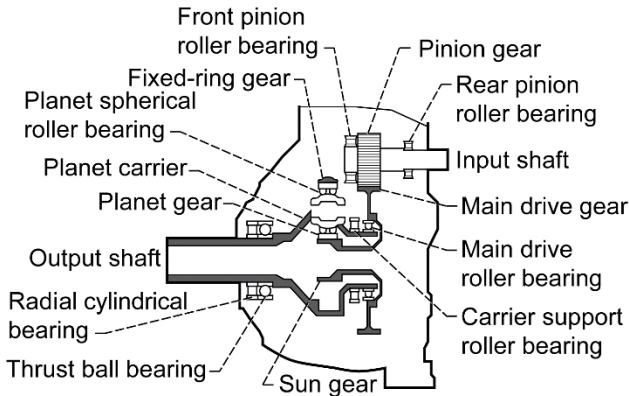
Commercial turboprop gearbox (Ref. 94).
